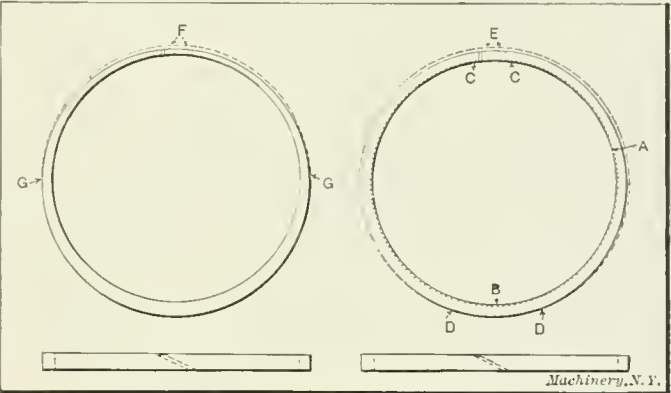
Eccentric Piston Ring of the Usual Type Fig. 2. Peened Piston Ring, showing Location of Peening Marks
